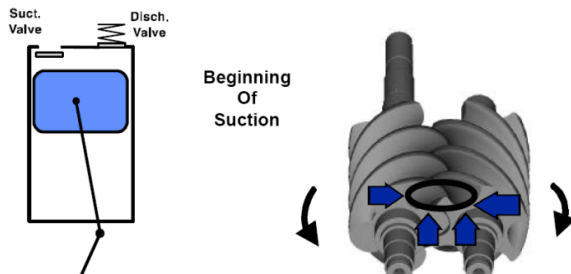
How compressors are started suction of fluid in left reciprocating and right twin rotary screw compressor
